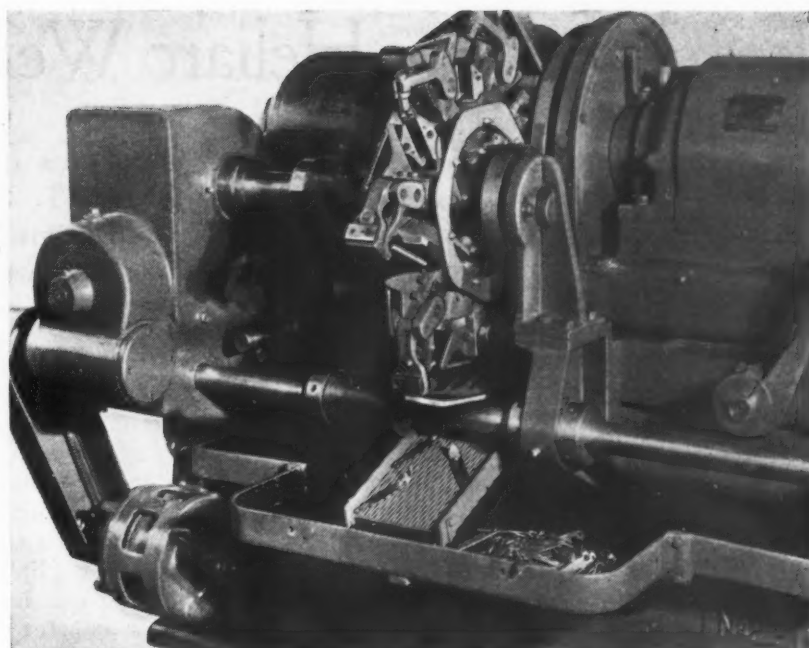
Eight-station, Automatic Indexing Fixture for Grinding Bevels to Form the Cutting Edges on Beer-can Openers
